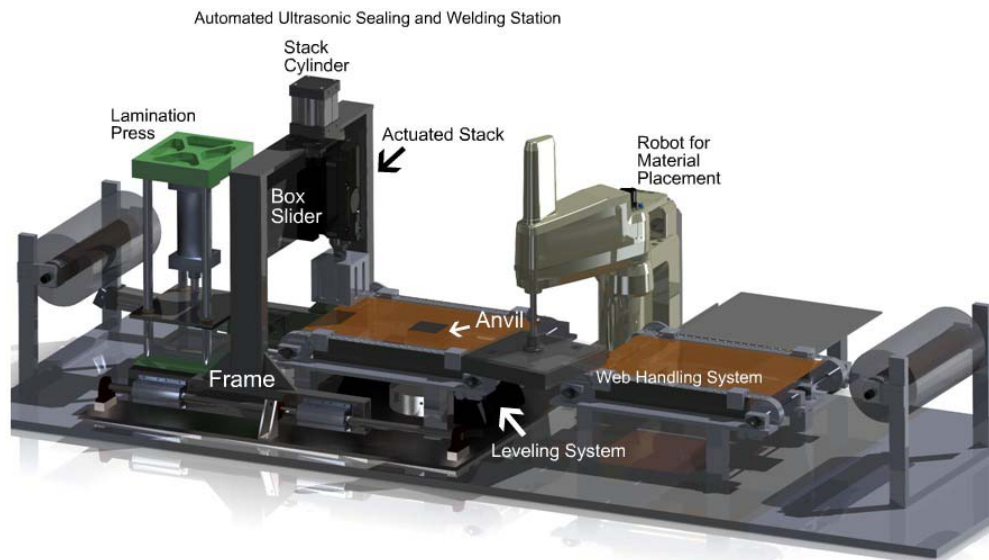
CAD model of automated roll-to-roll ultrasonic sealing and welding station concept
